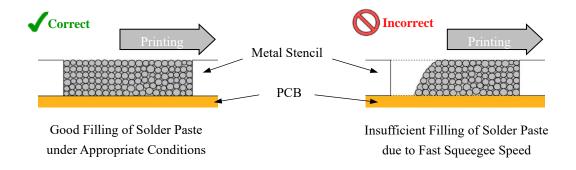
Squeegee Speed and Solder Paste Filling in the Metal Solder Stencil Aperture
